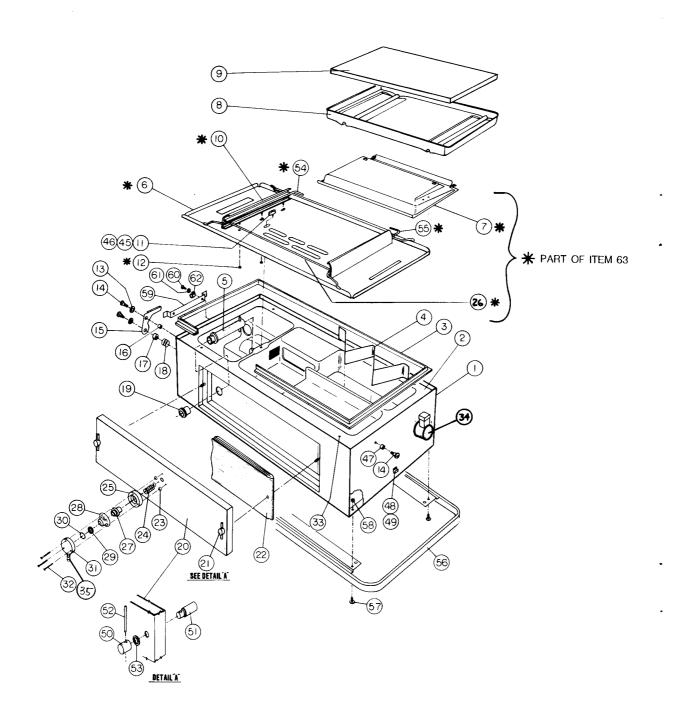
PARTS LOCATION DIAGRAM, SHELL ASSEMBLY AND DECK ASSEMBLY
